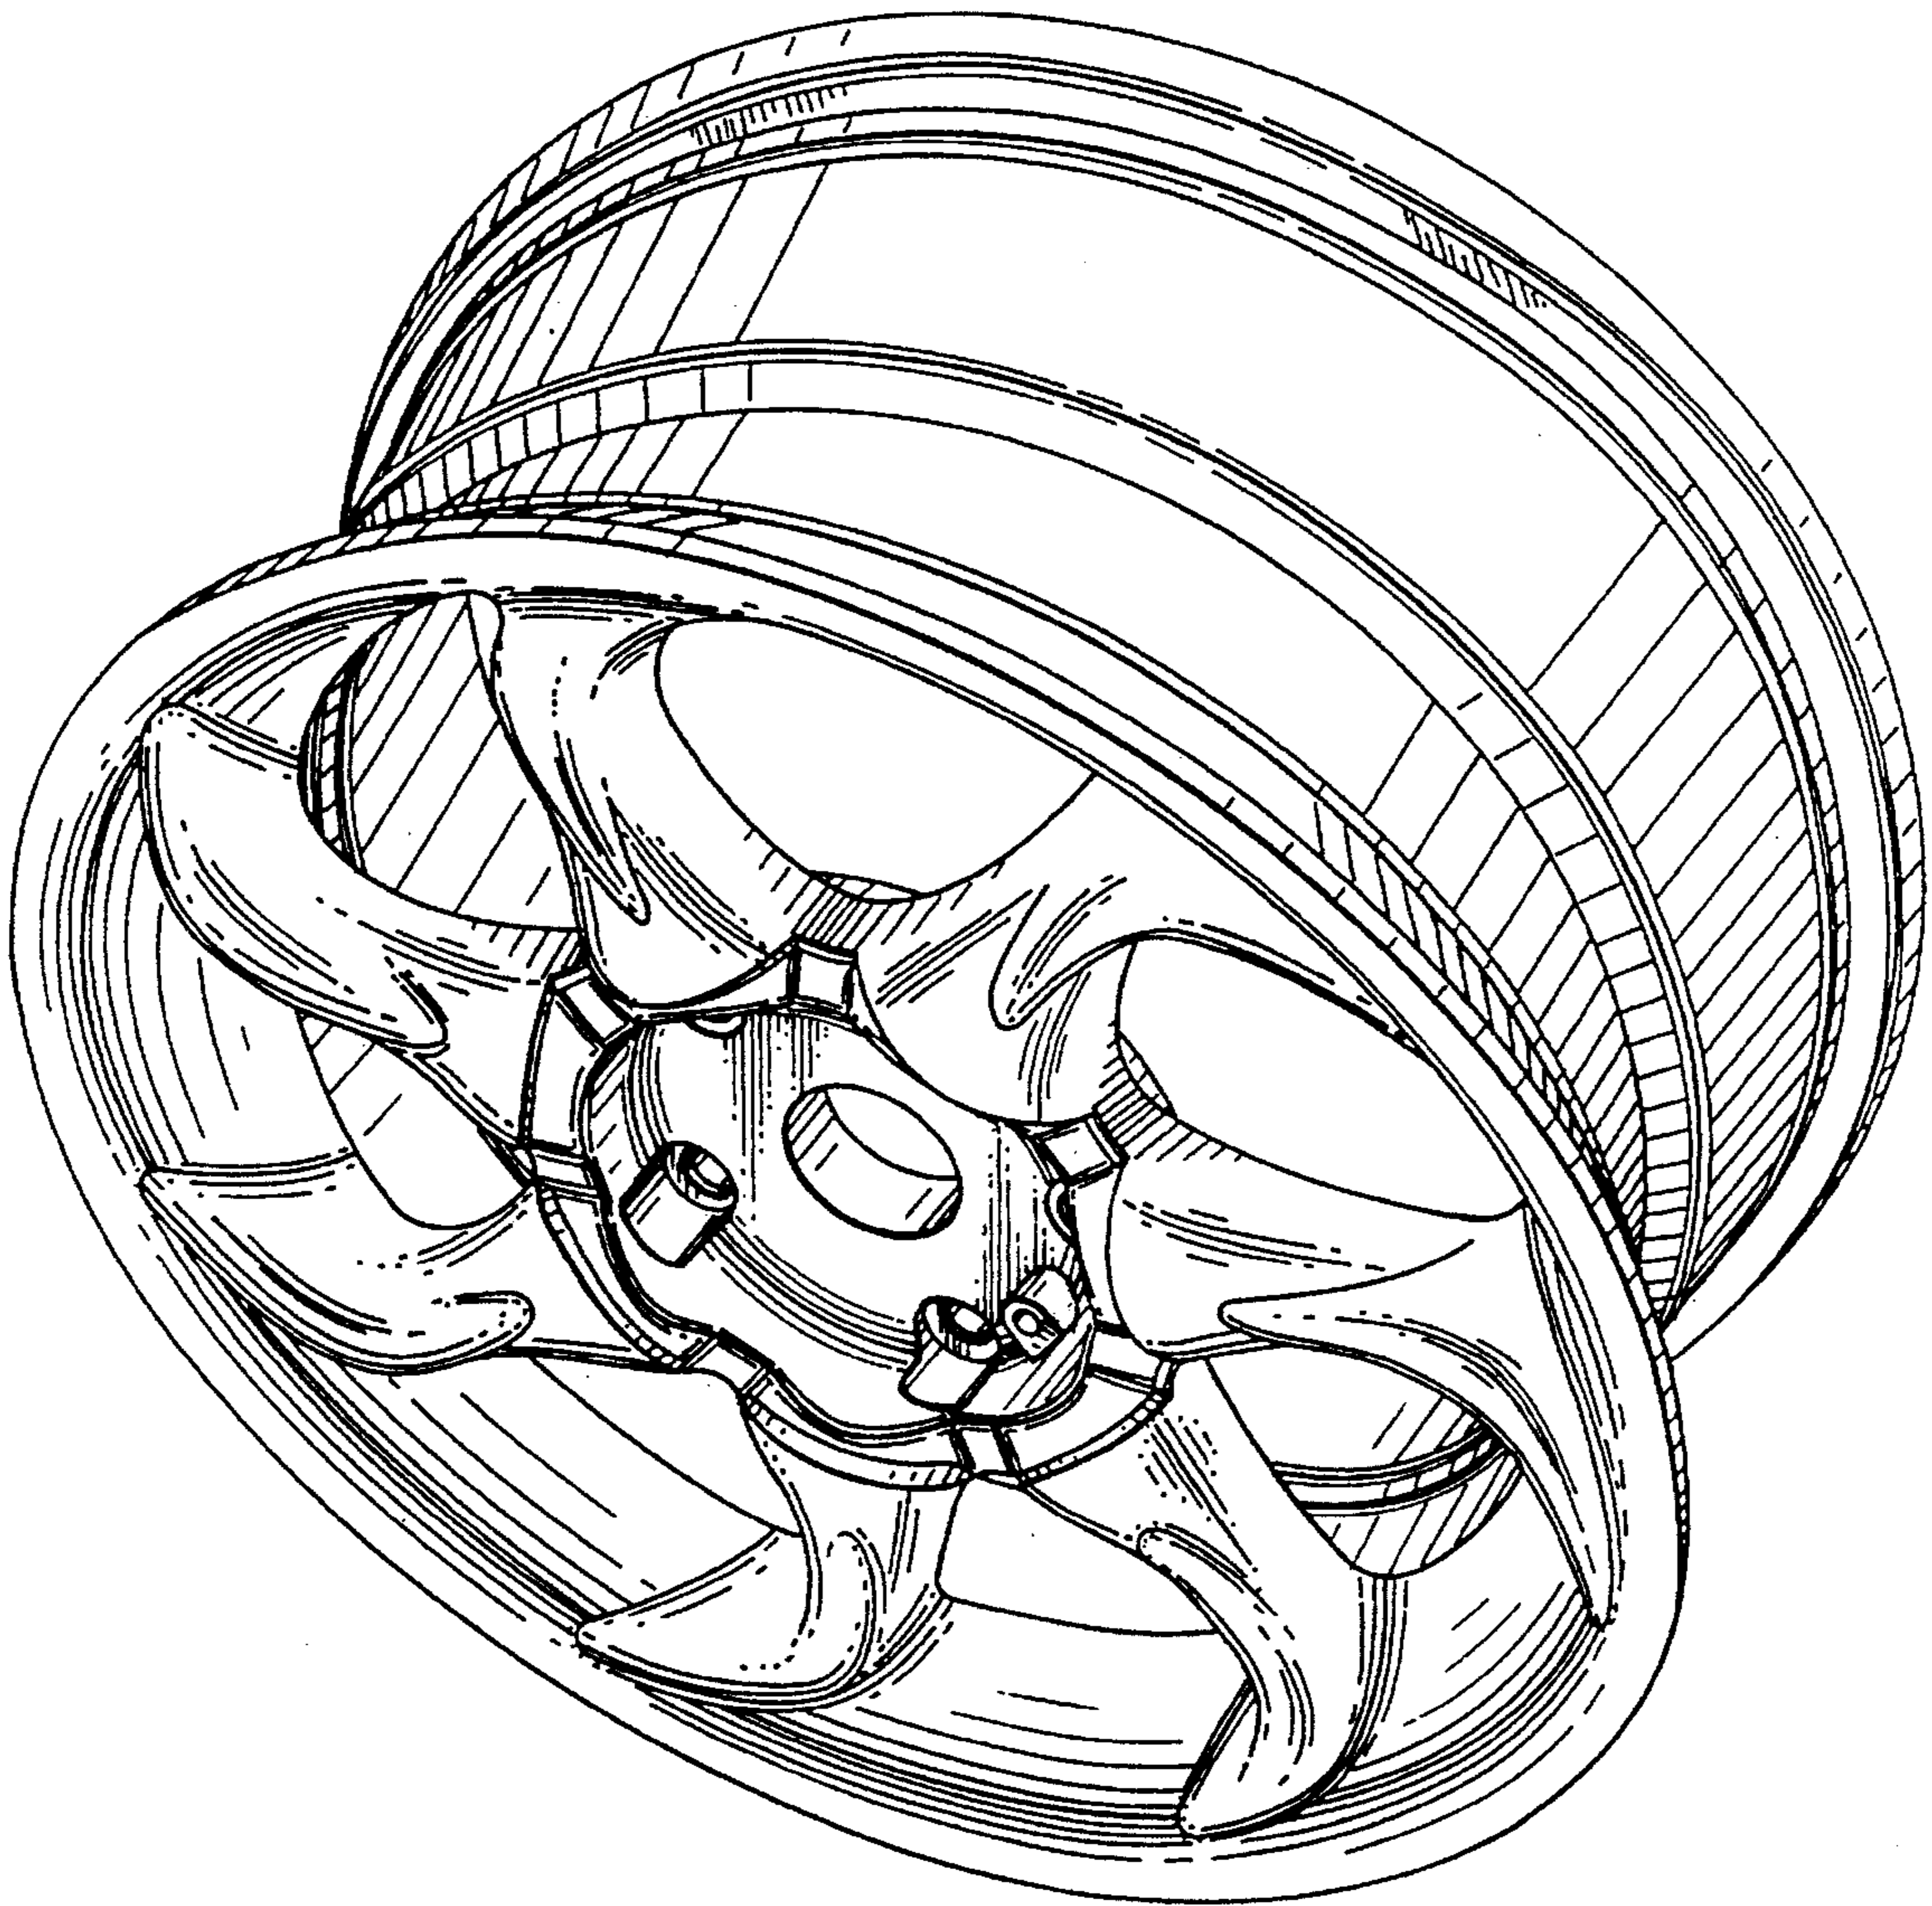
is a perspective view of a vehicle wheel showing a new ornamental design of a front surface of the wheel; FIG. 2 is a front elevational view of the wheel front surface; FIG. 3 is a side elevational view of the wheel, and with the opposite sides being a mirror image; FIG. 4 is a rear elevational view showing the wheel rear surface. The number and spacing of lug holes are not part of the claimed design; and, FIG. 5 is a front elevational view similar to FIG. 2, and with the addition of a central cover plate.
